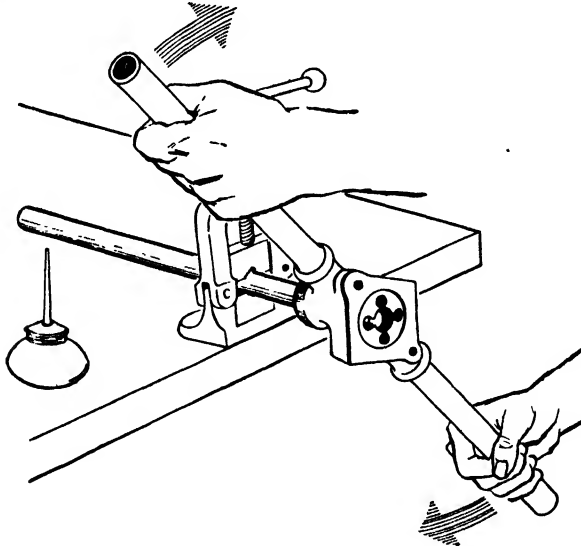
Threading pipe. Keep the die lubricated with lard oil or threading oil. Stop and back the die off when about one thread projects through.
